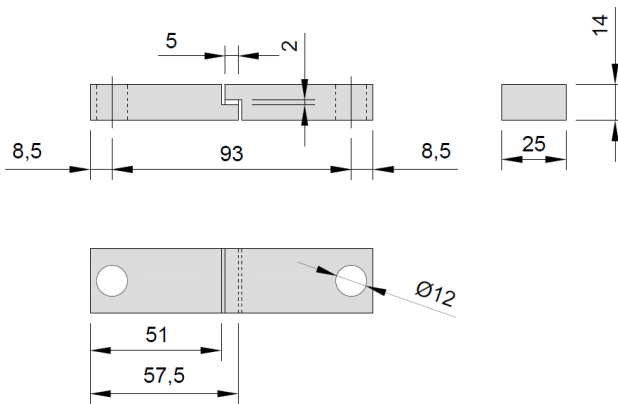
DIMENSIONS OF THE THICK ADHERENT TEST IN MM.
